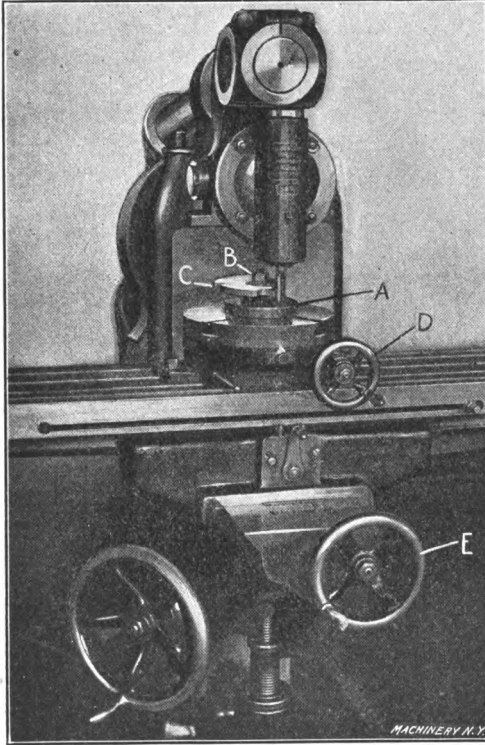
Cutting Thread Lobe on a Circular Milling Attachment
